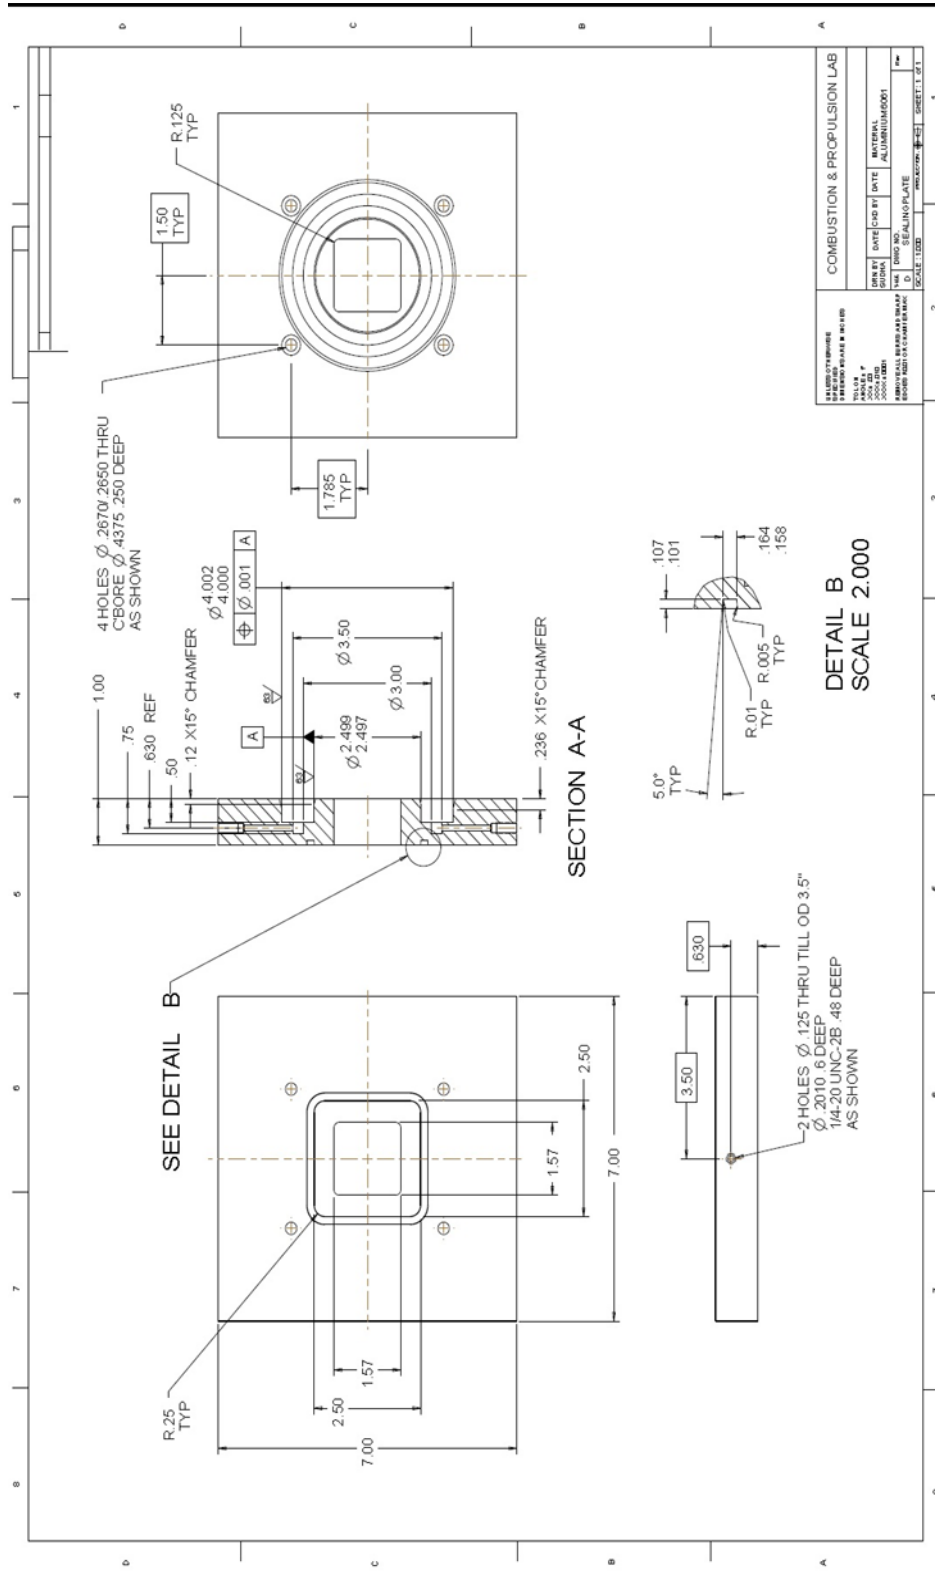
Sealing plate part drawing in the main chamber assembly
